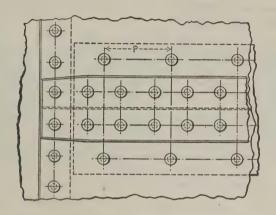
Example of Butt and Double Strap Joint, Double-Riveted
